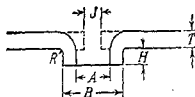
Elements of a hole flanged for tapping: J , diameter of original pierced hole; T , thickness of stock; R , bend radius of flange; A , ID of hole flange; B , OD of hole flange; H , width of flange.
